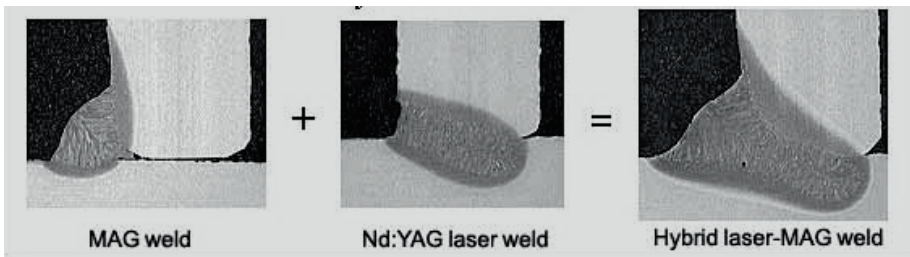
Schematic of the hybrid laser/arc welding process (ref. [www.fronius.com](http://www.fronius.com))
